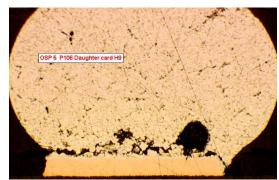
Typical Fatigue Failure on Metro1, Daughter card Side
